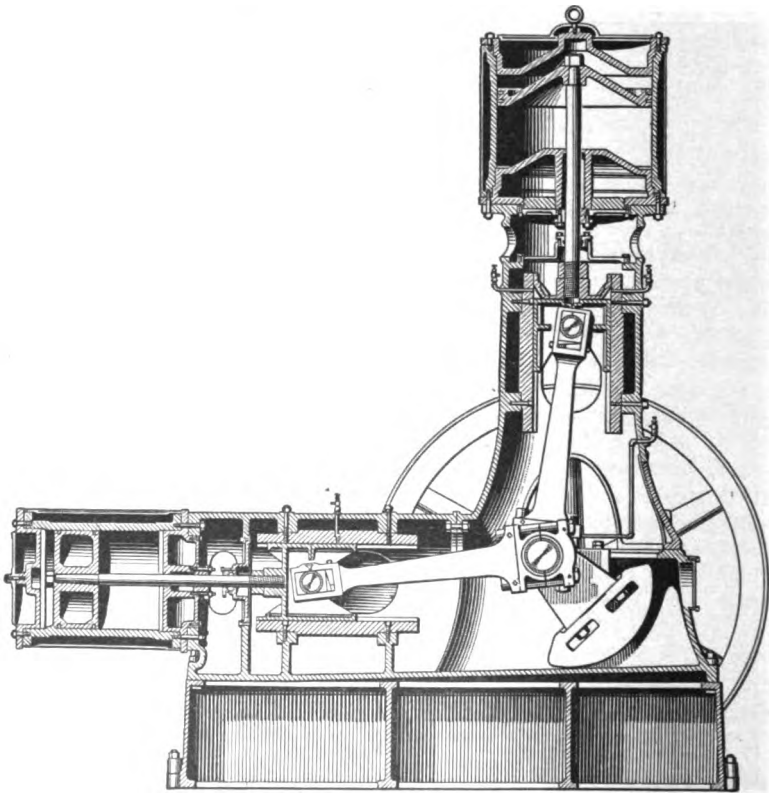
Art. 507. — Angle-Compound Engine. (American Ball Engine Company.)
